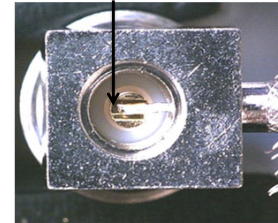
solder to center contact (minimal solder bead), with minor solder fillet
